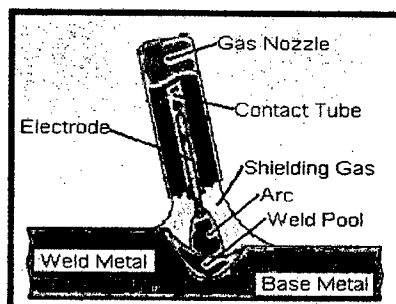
Basic structure of metal inert gas (MIG) welding.
